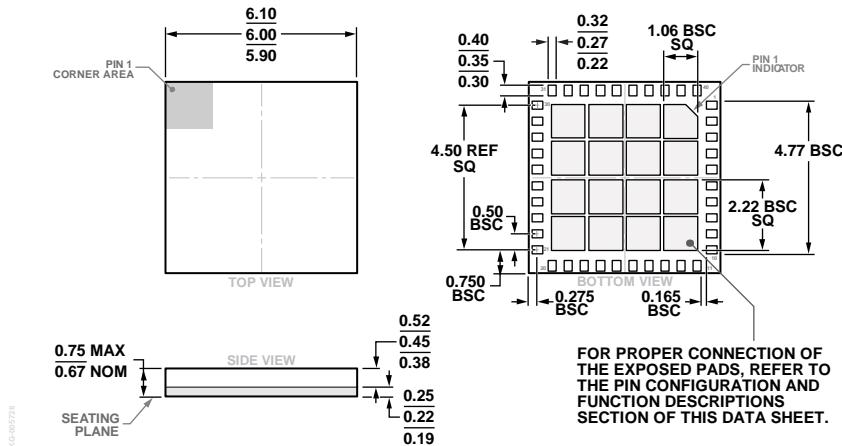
40-Terminal Land Grid Array Package [LGA]
